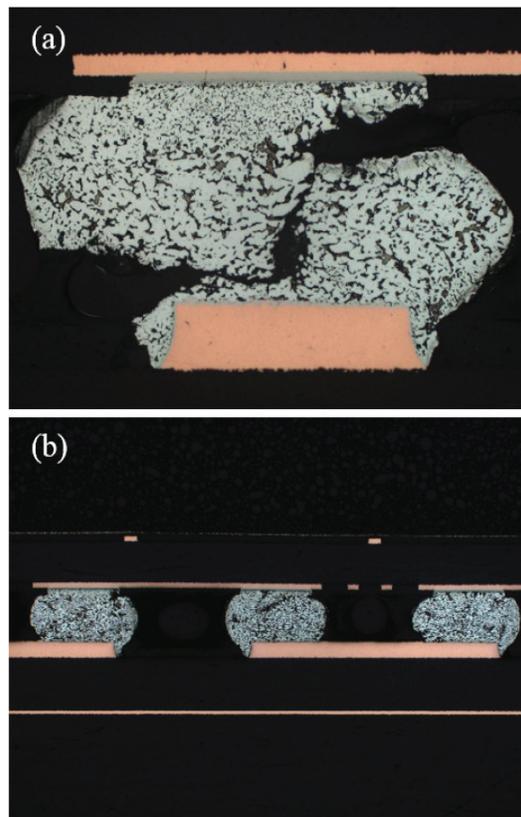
Sn63Pb37 BGA with thick conformal coating failed at 1055 thermal cycles (-20 to 80°C): (a) corner joint; (b) joints in the middle of a row.
